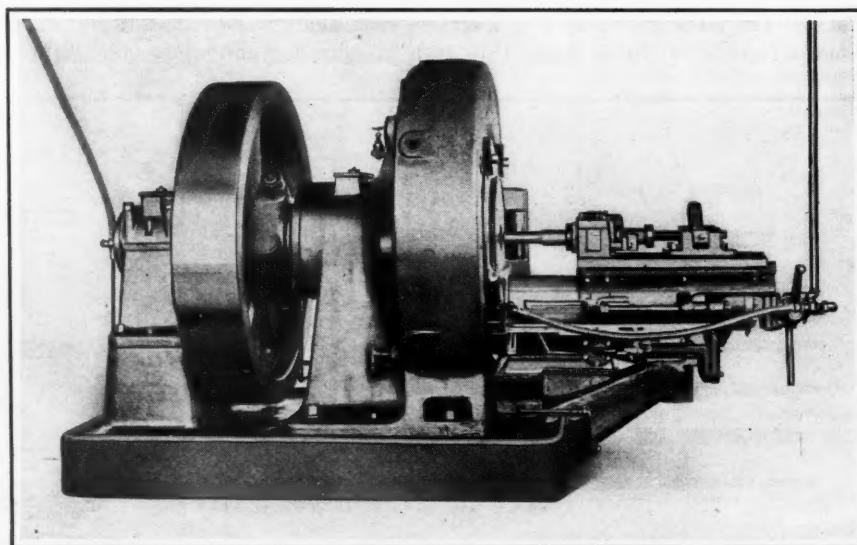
Swaging Heavy Work on a Machine having a Pneumatically Operated Work-holder and Hydraulic Feeding Mechanism
